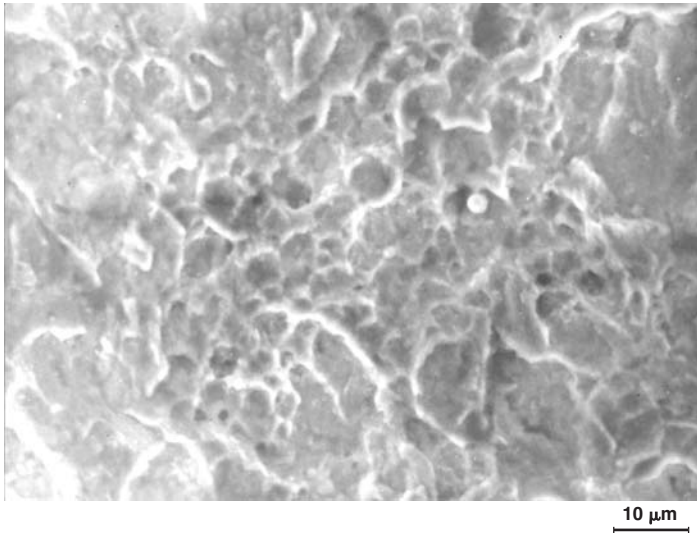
SEM fractograph of the stud. Elongated dimples indicate failure due to shear loads.
